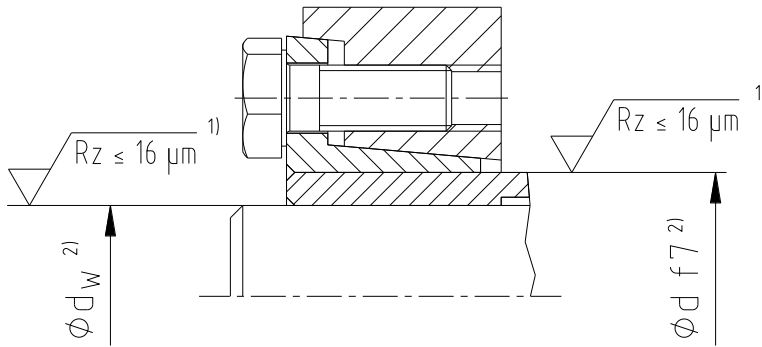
Tolerances and surfaces (example: CLAMPEX® KTR 620)
